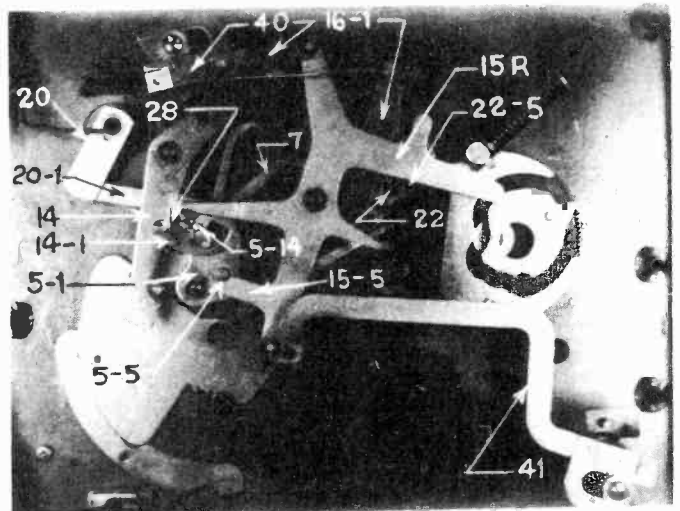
Bottom view corresponding to Fig. 11. The friction-clutch plate 5-1 has been pushed partially outwards (thus moving the tone arm) so that pin 5-14 becomes latched to link 5-1 by latch pawl 14-1 and so with locating lever 14. The record shelves have been turned further by the inward movements of the toothed links 40 and 41. This is check point No. 6.
